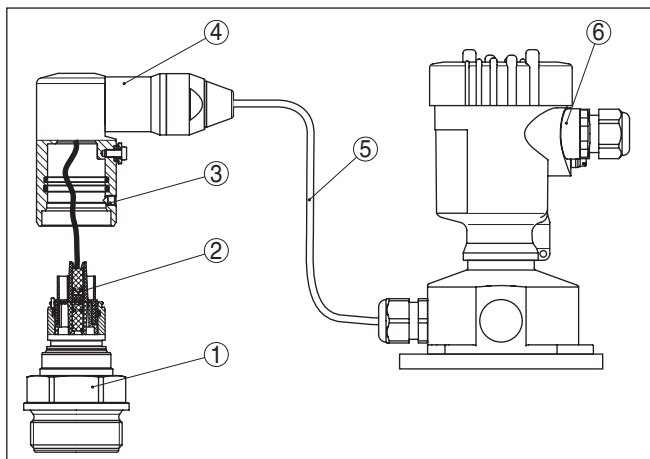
VEGABAR 81 in IP 68 version, 25 bar and lateral cable outlet, external housing
